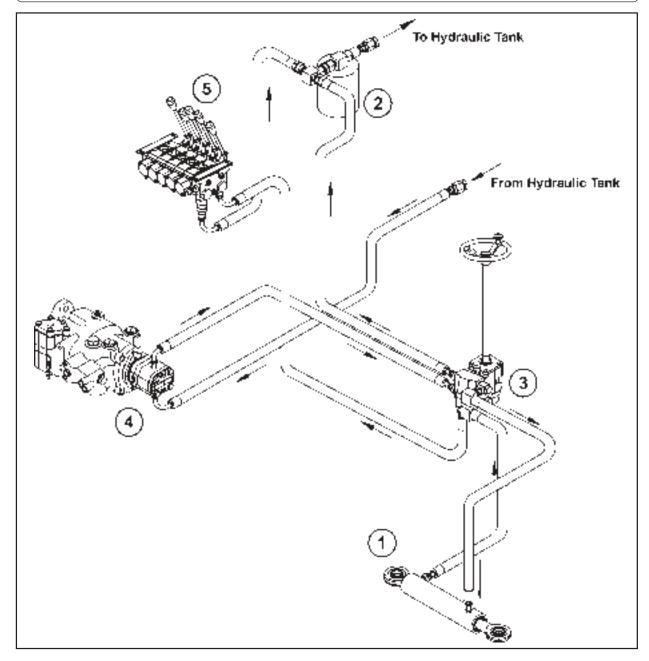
HYDRAULIC SYSTEM COMPONENT LAYOUT
